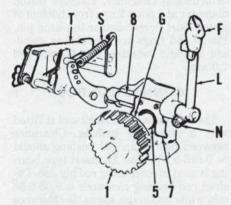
View of governor mechanism. Refer to text for operation.
